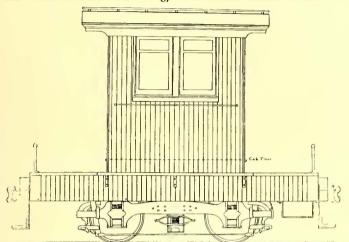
SWITCHING LOCOMOTIVE ELEVATION
